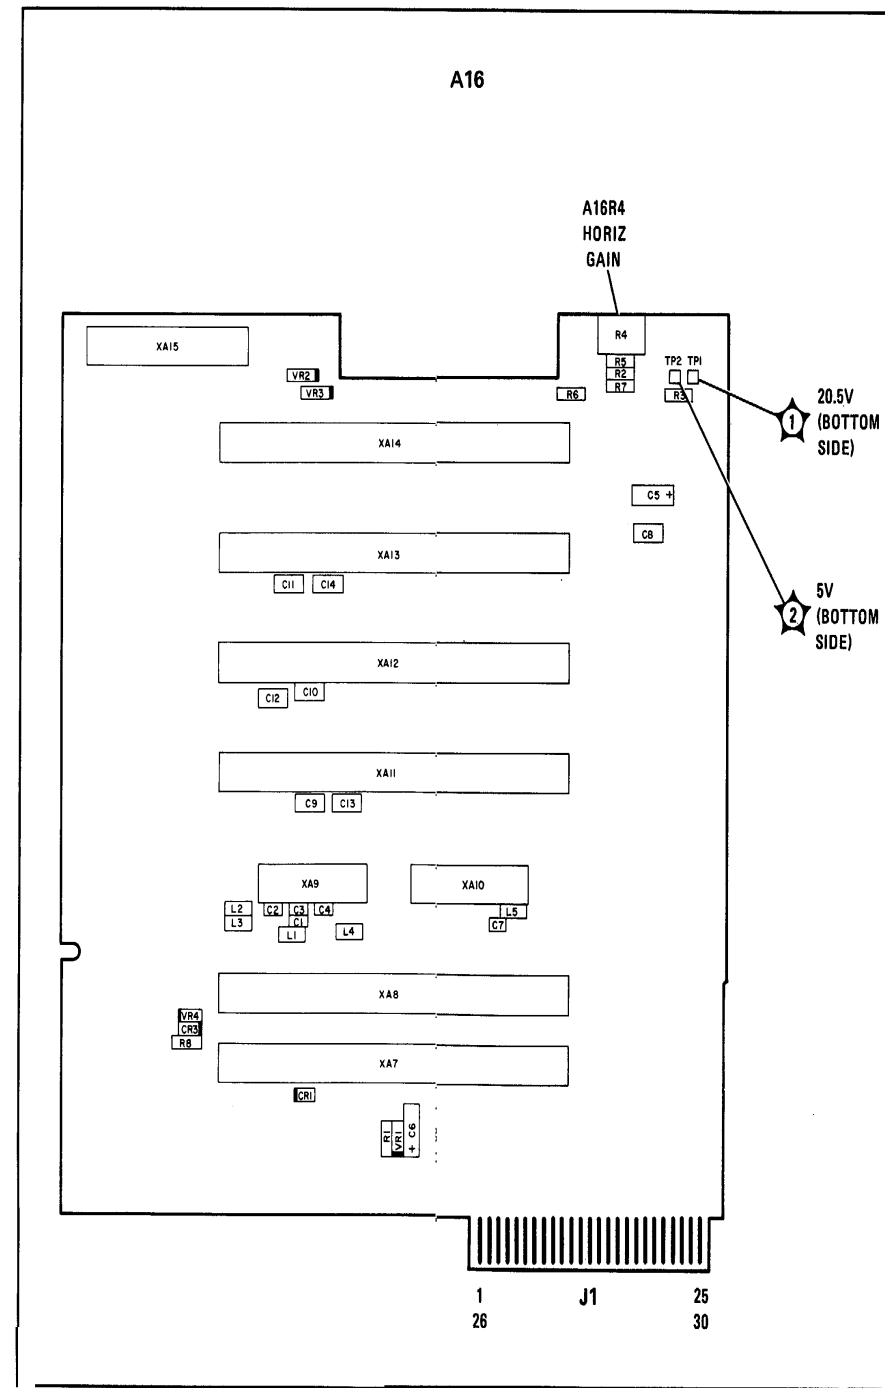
A16 Motherboard Assembly, Components and Test Point Locations
